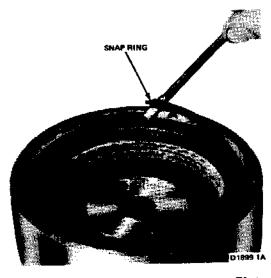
Removing Forward Clutch Pressure Plate Snap Ring
